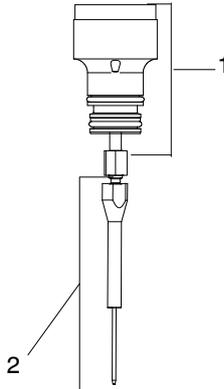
Piston/Cartridge Assembly and Needle Assembly
